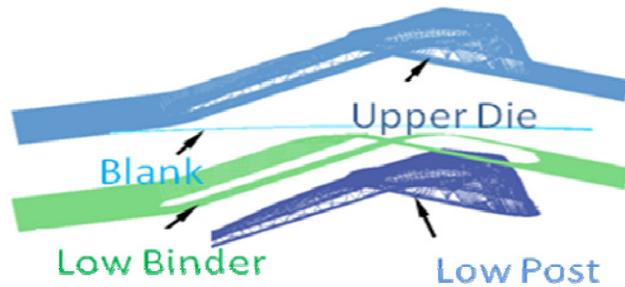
Initial Setup for Binder Wrap with a Pre-draped Blank
